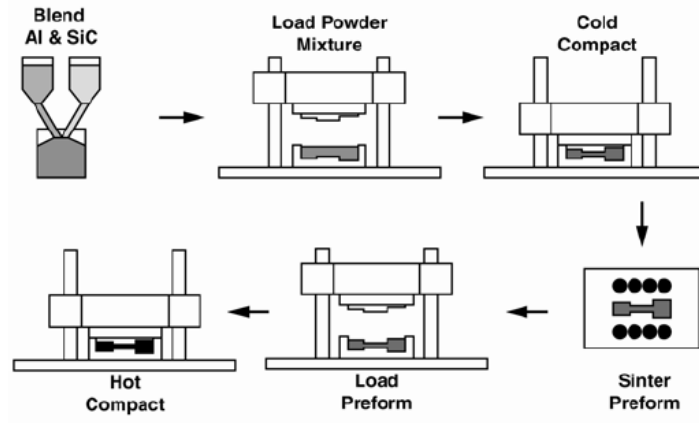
Sinter-forging technique for producing near-net shape, low cost MMCs[61]
